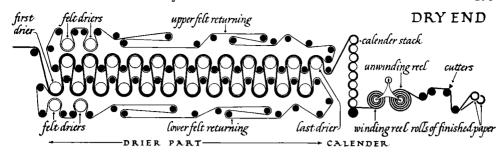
Above and opposite, the Fourdrinier paper-making machine.
